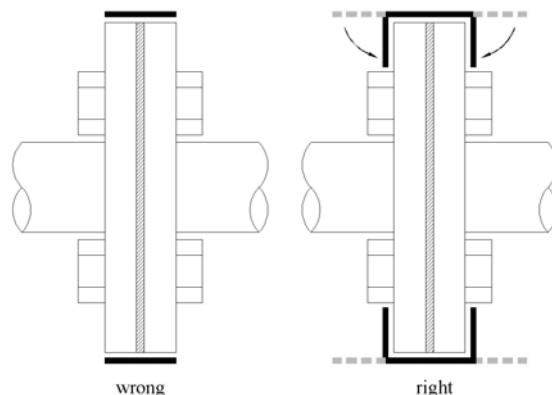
Recommended arrangement of anti-spray cover for flange joint
